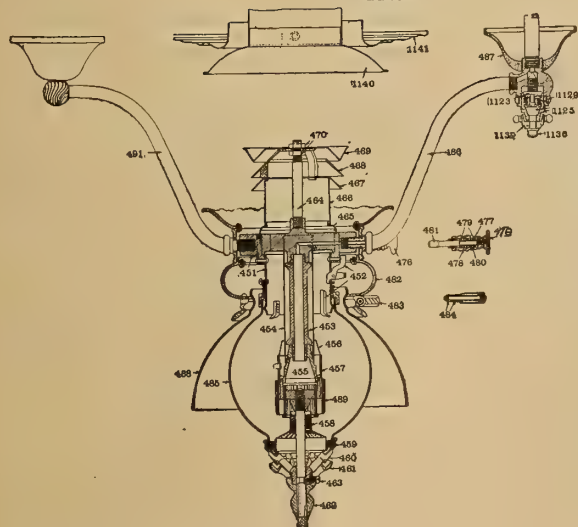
SECTION OF ARGAND LAMP, No. 450.
